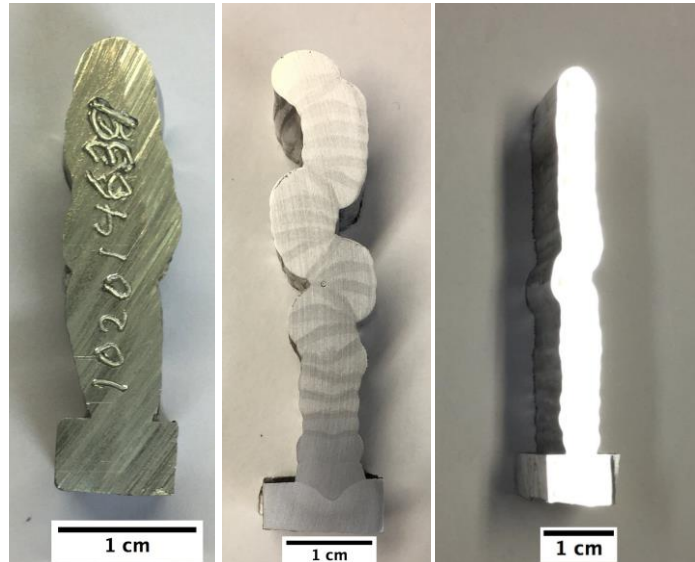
Cross section images of, a) the wall AA4020_S1, b) the wall AA4020_S2 and c) the wall AA5083_S3. Large differences with regards to shape are observed. The AA4020_S1- and AA5083_S3-wall has the best matching shape to the modelled structures.
